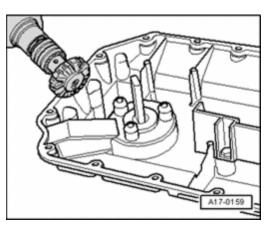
Using Rotating Plastic Brush To Remove Any Remaining Sealant From Oil Pan (Lower Part)
